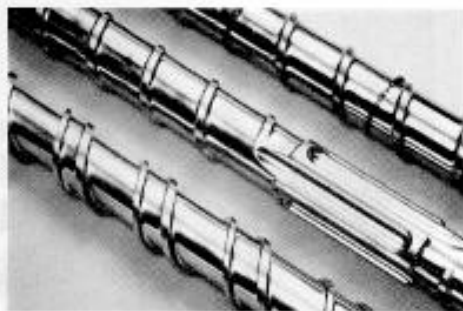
Three extrusion screws. (Courtesy Davis-Standard)
